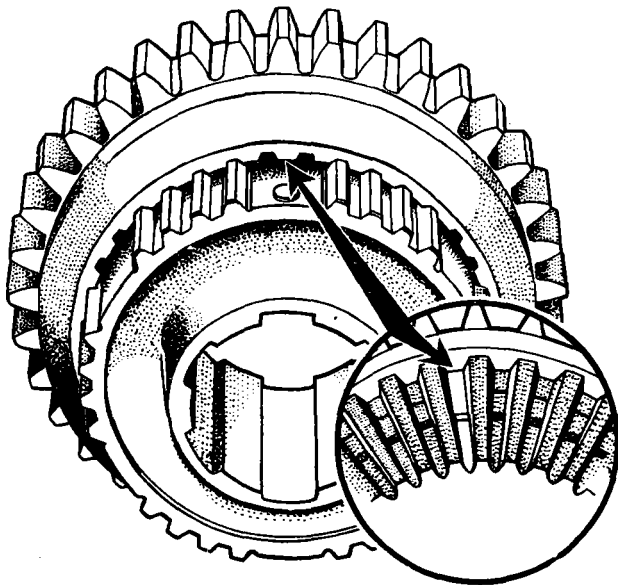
When fitting the 1st speed gear to the 2nd speed synchro sleeve the relieved tooth on the internal splines must be in line with the stop pin in the sleeve.
